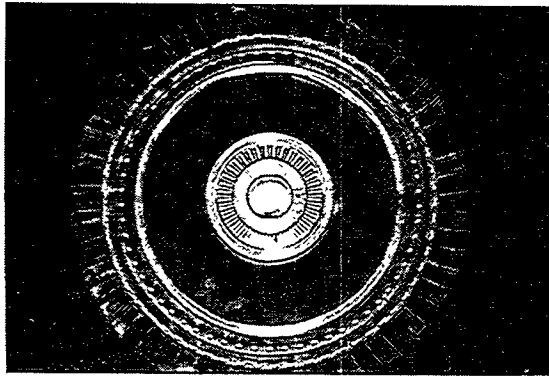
First Stage Disk with NT164 Dovetail Blades After Engine Disassembly
